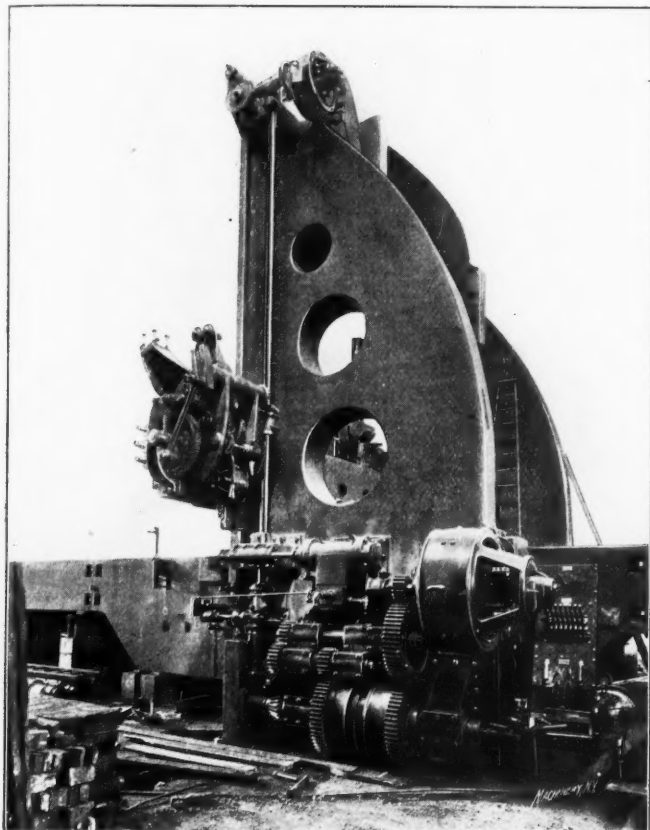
View showing the 100-horse-power Motor for the Main Drive.
